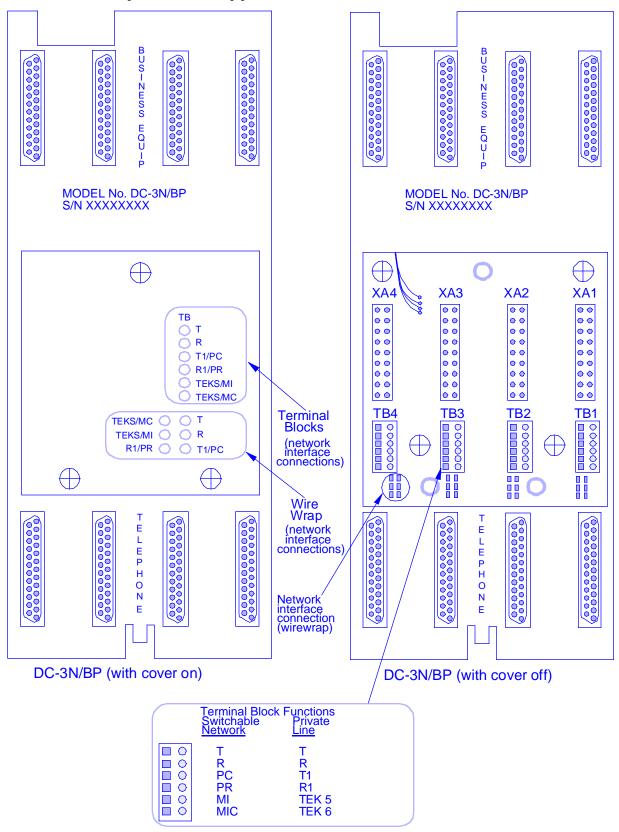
USS AC or DC Backplane Assemblies (Sheet 6 of 7)
